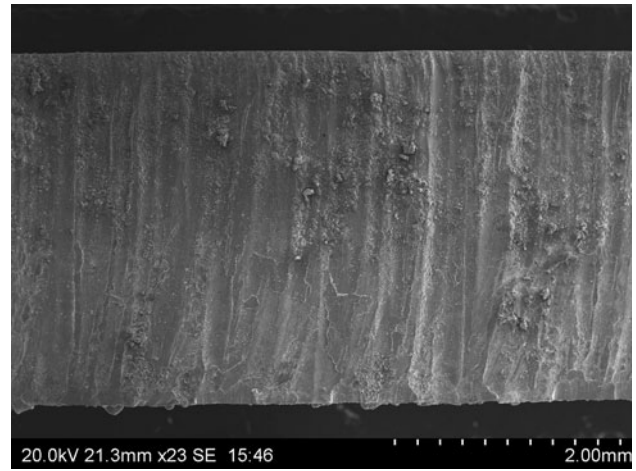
The cut edge of a carbon-steel sample that was considered good
